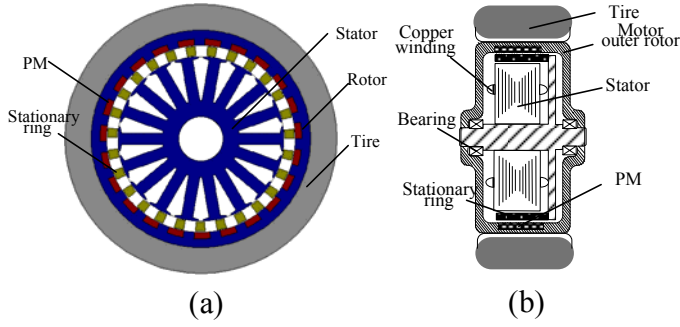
Configuration of the proposed in-wheel PM motor. (a) Front view (b) Side view.
